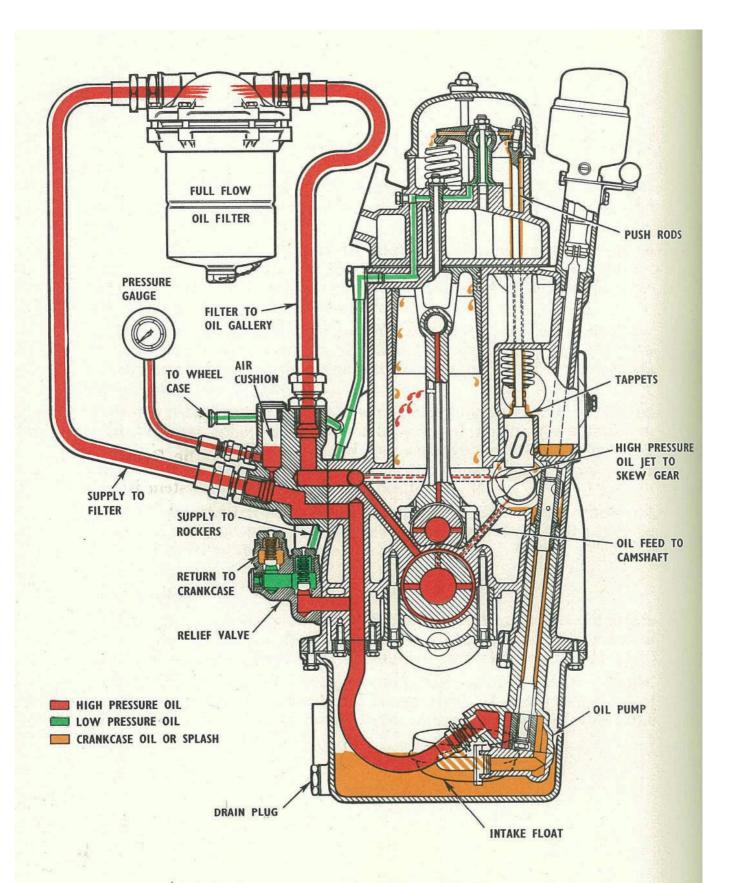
ENGINE LUBRICATION SYSTEM.
